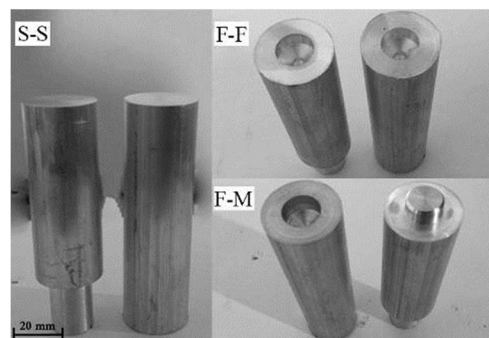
Three types of samples prepared for welding: (1) Simple geometry (S-S); (2) Geometry with hole on the workpiece (F-F); (3) Geometry with pin and hole on the workpiece (F-M)
